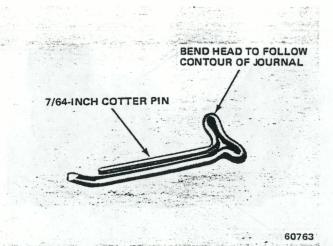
B-39 Fabricated Upper Main Bearing Insert Removal and Installation Tool
